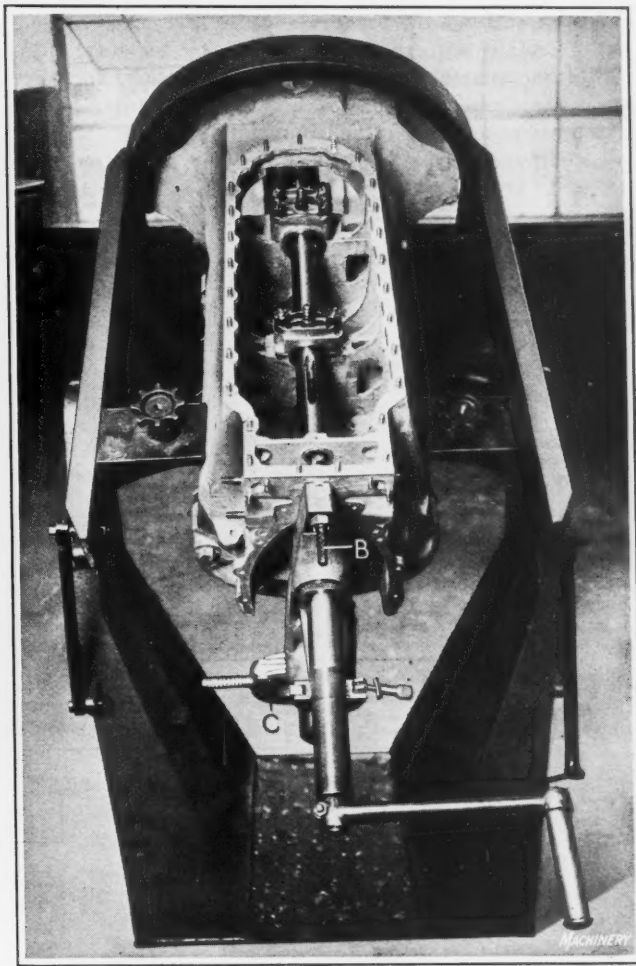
View of Reverse Side of Crankcase, showing Interior and Bar in Place
